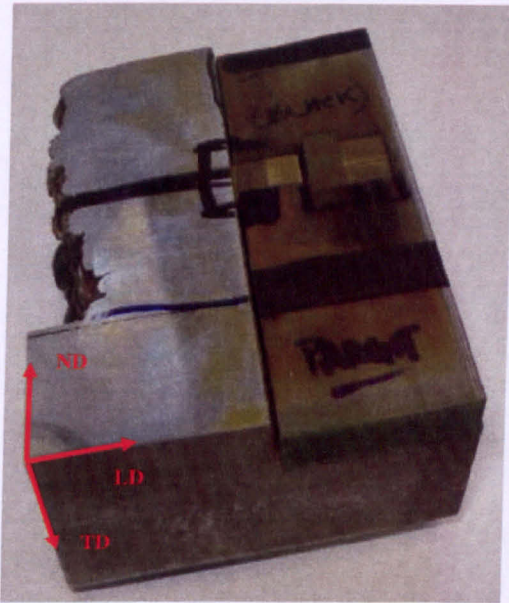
Location of the cuboids in the weld-pad
